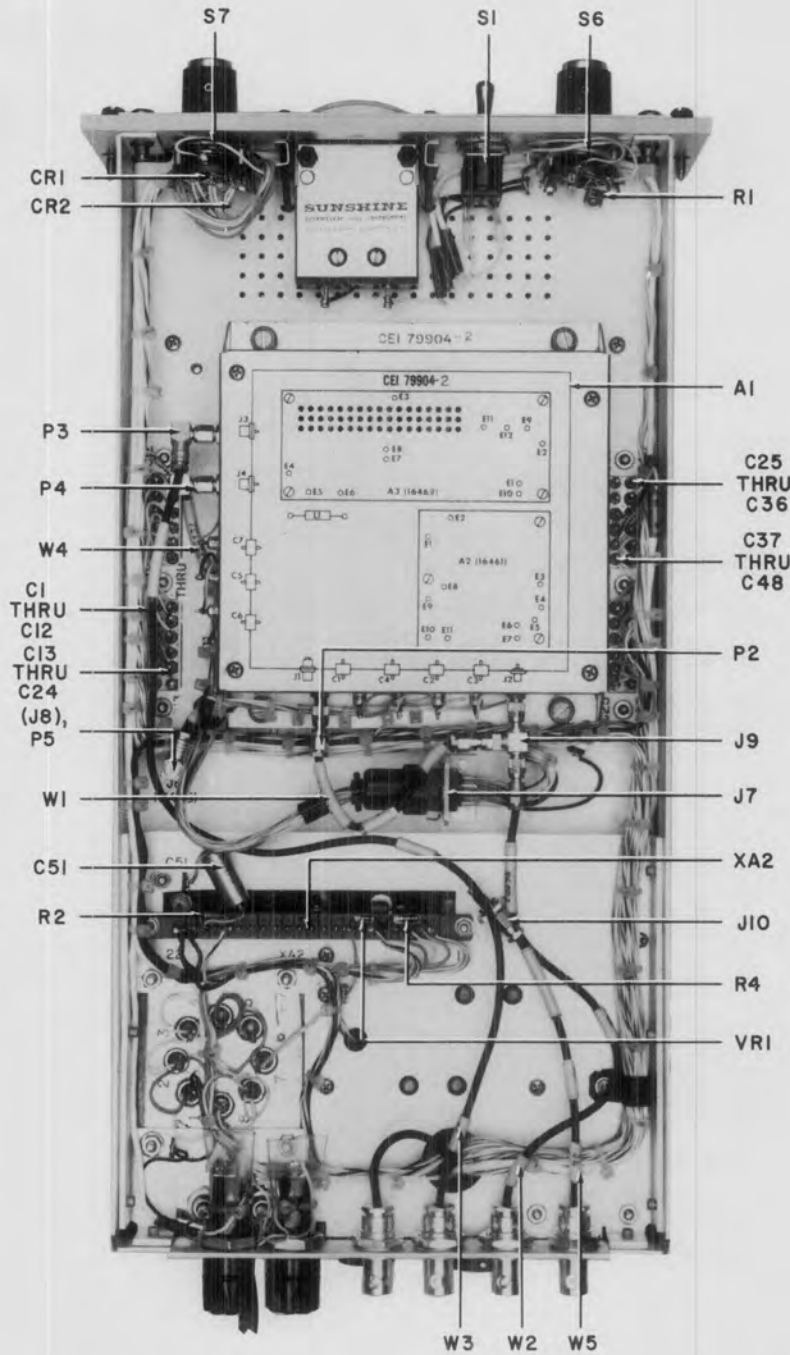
Type DRO-302B Frequency Counter, Bottom View, Location of Components
